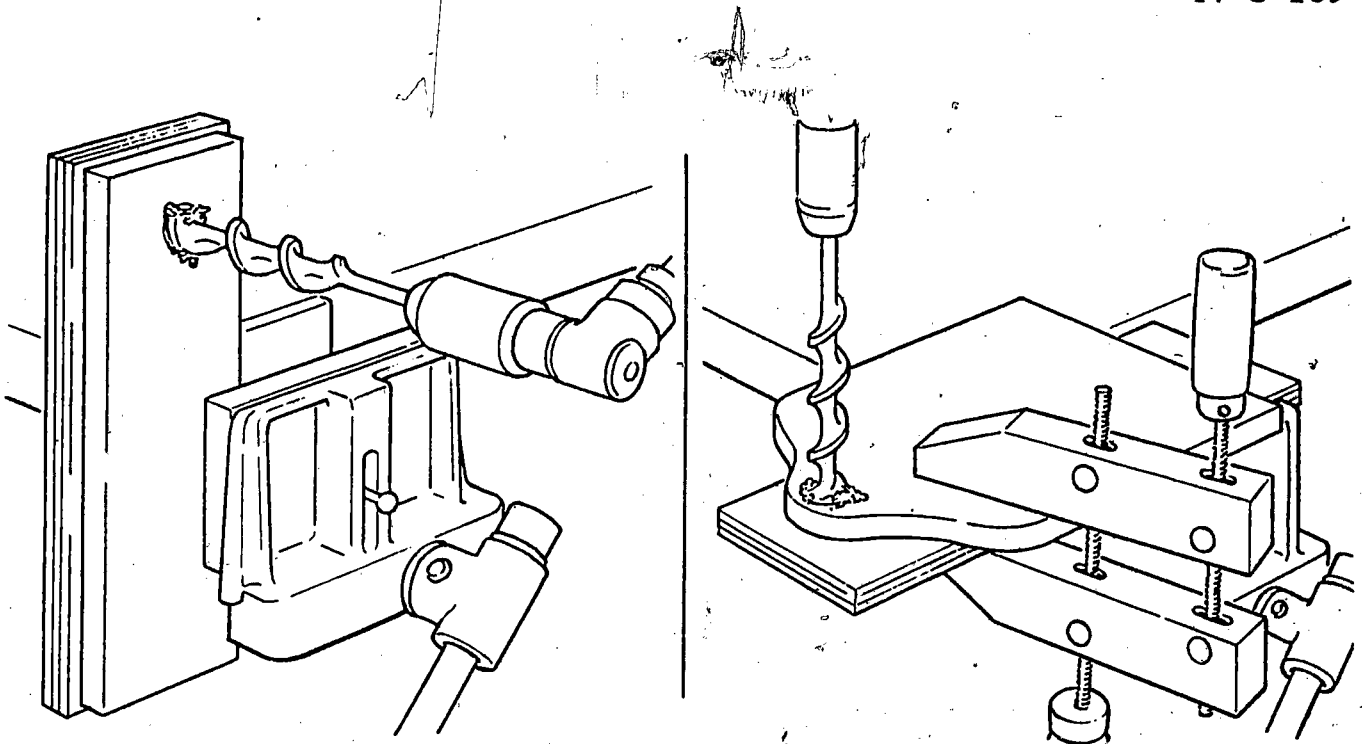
Left. Boring a hole in a horizontal position with a brace and auger bit.
